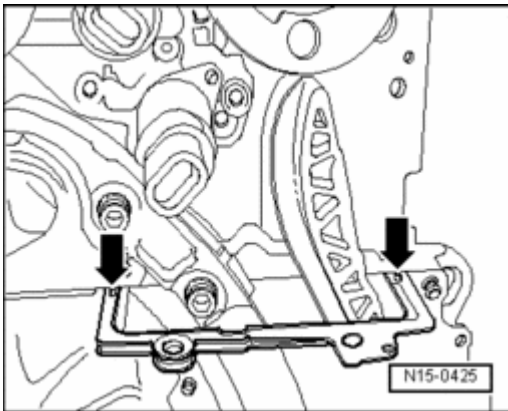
Locating 3 mm Holes In Cylinder Head Gasket
